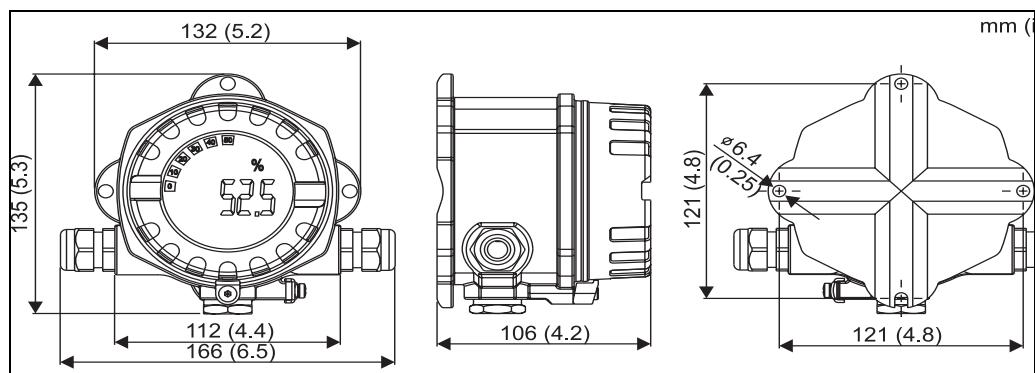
Installation dimensions; dimensions in mm (dimensions in inches in brackets)
